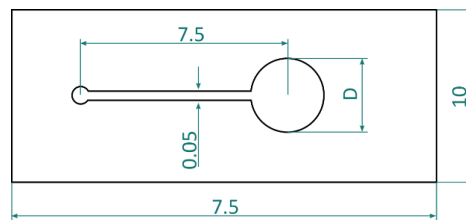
Drawing of a pressure test sample with circular cavity.
